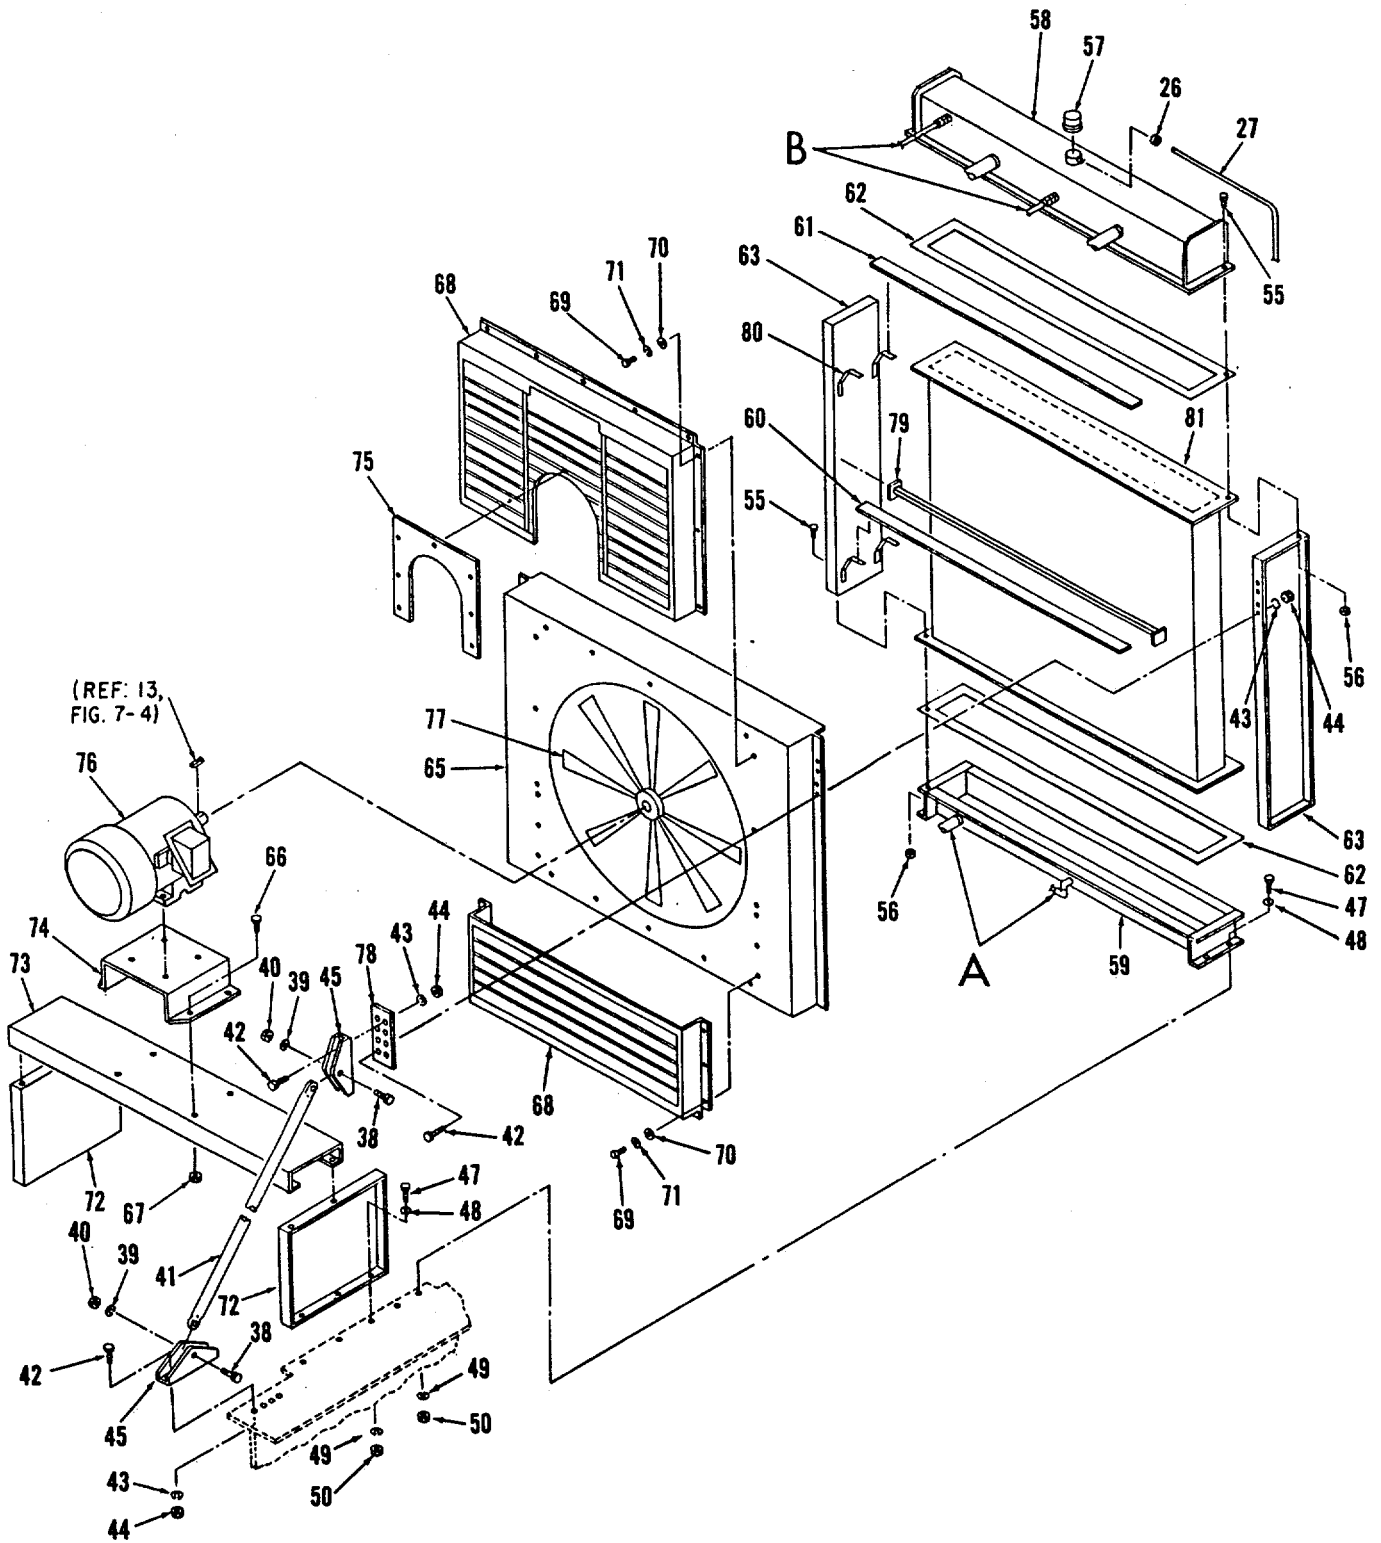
Radiator Assembly, Code B, Exploded View (Sheet 1 of 2)
